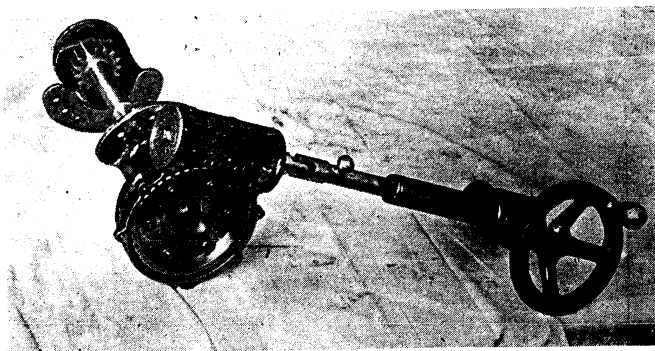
ELEVATING MECHANISM ASSEMBLY
